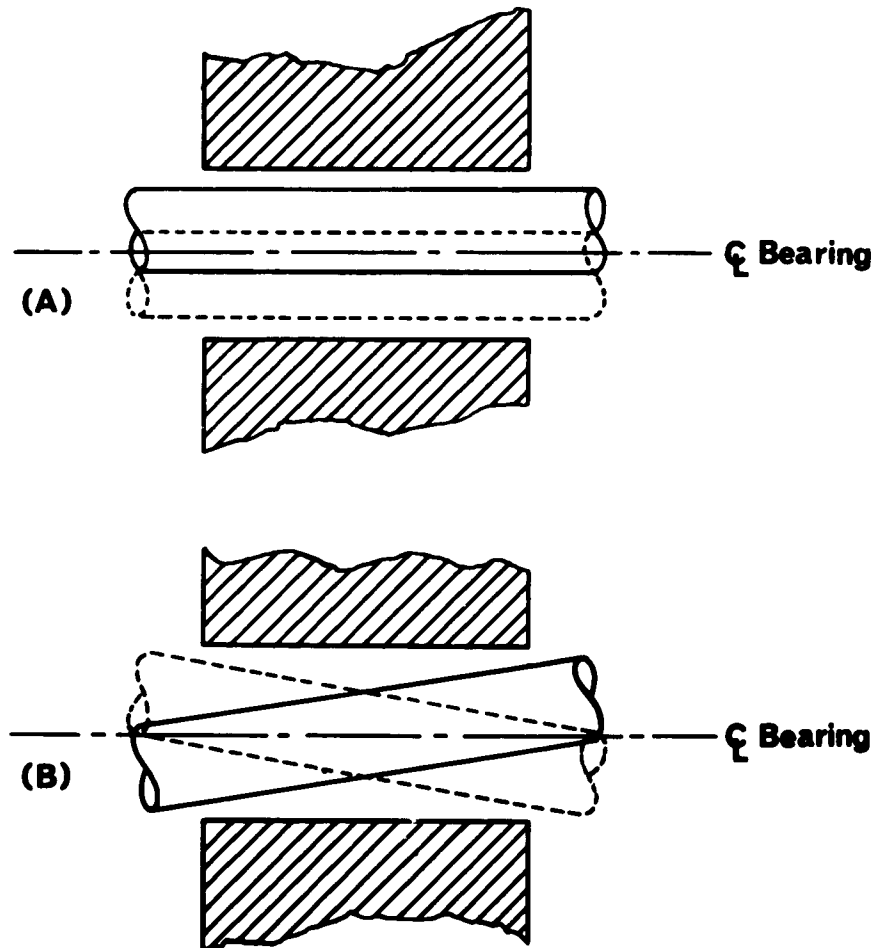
Indication of Synchronous Whirl of Shaft in Journal Bearing.
